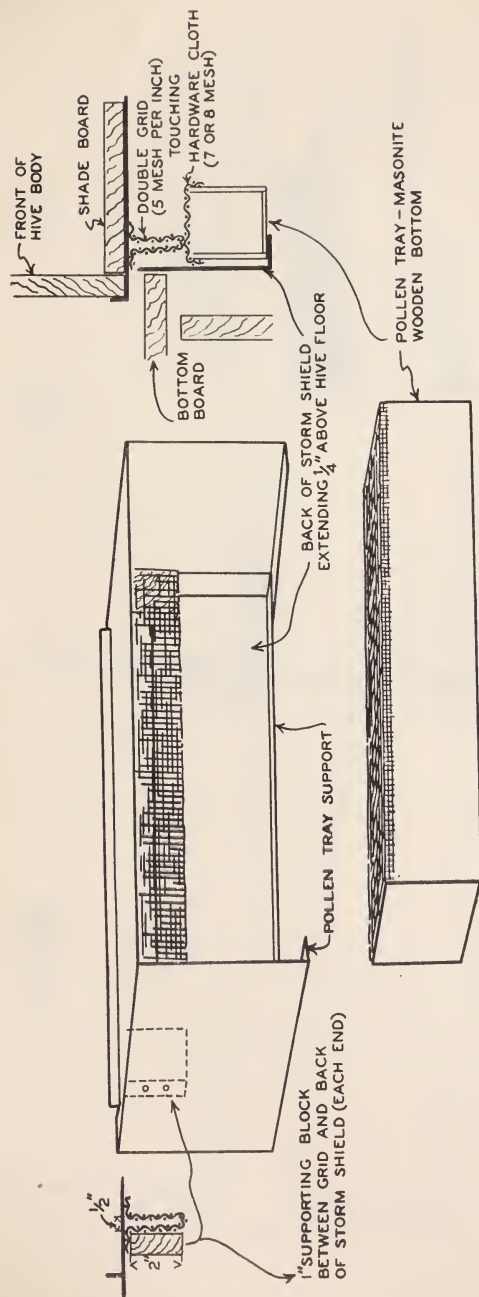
LINE DRAWING OF DETAILS OF POLLEN TRAP.
